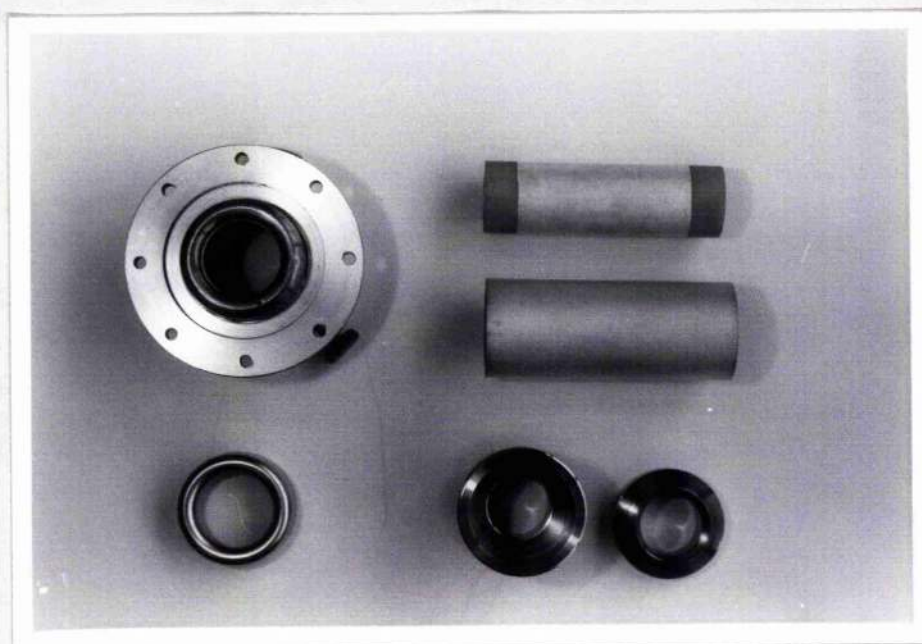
Components of fabricated PZT assembly. Finished mirror mount (upper left) with invar cup component beneath. Two PZT - 5 H (Vernitron) tubes and mounting rings carefully fitted for tube alignment.
